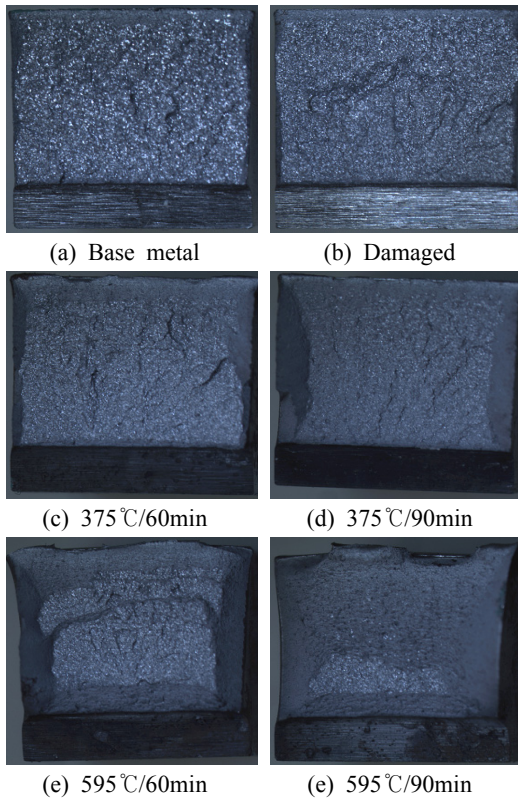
Fracture surface according to specimen condition obtained from V-notch Charpy impact test
